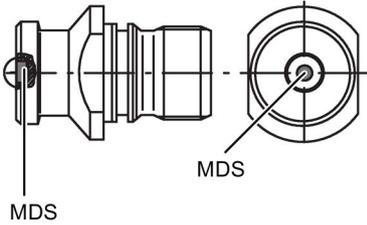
Installation example of MDS D421/D521/E623 in a stud bolt
